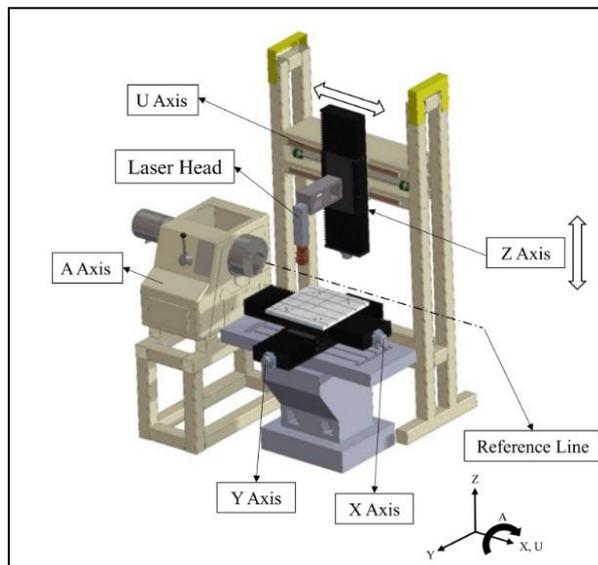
Schematic diagram of the CNC drive axes (Ratusznei, 2019)
